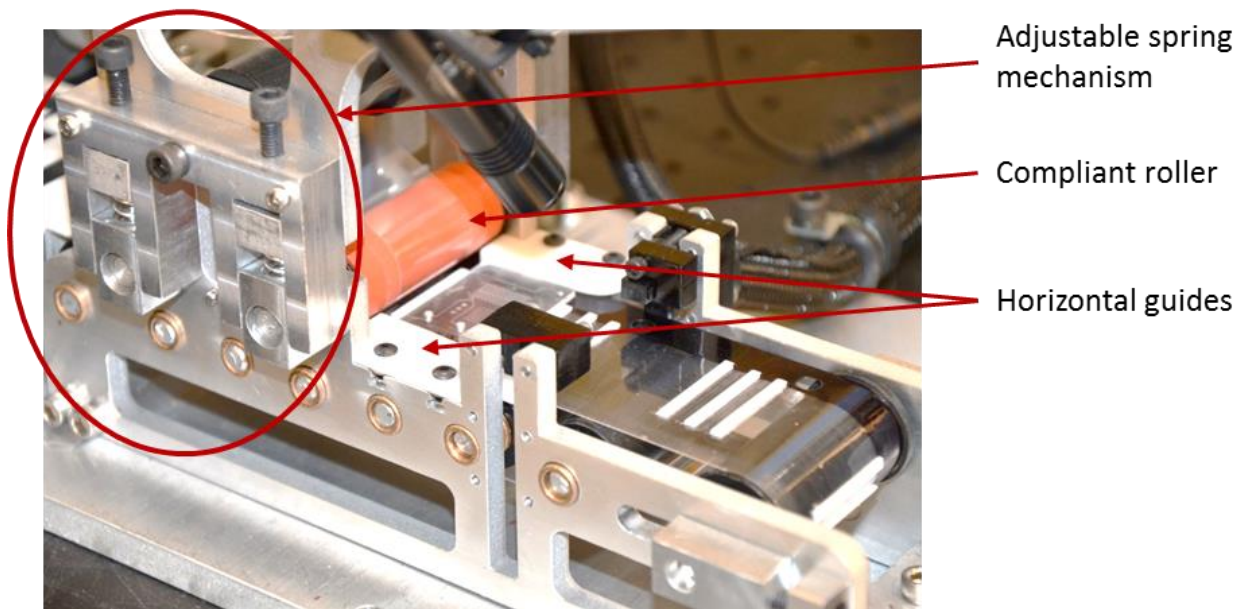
The final assembled spring mechanism. The belt transports chips from right to left. The first roller (in orange) applies tape to the chips. The force on the rollers can be adjusted by screws. Horizontal guides (in white) center chips on the belt before they are taped.
